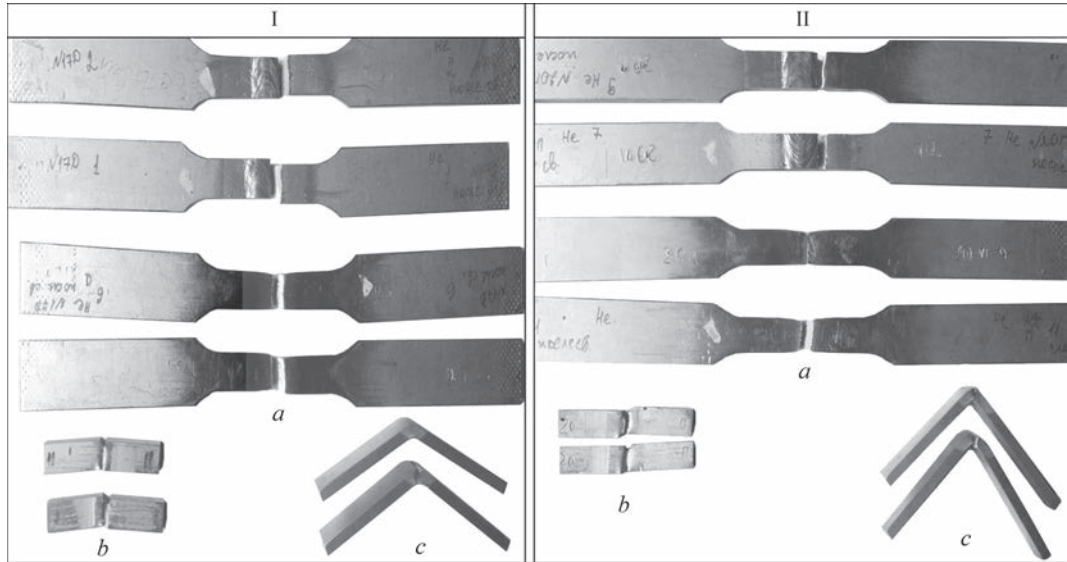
Fractures of samples of welded joints of 5 mm 2219-T31 alloy produced by nonconsumable electrode in argon along (I) and across (II) the rolling direction, after mechanical tensile testing: *a* — samples without reinforcement; *b* — samples with reinforcement
